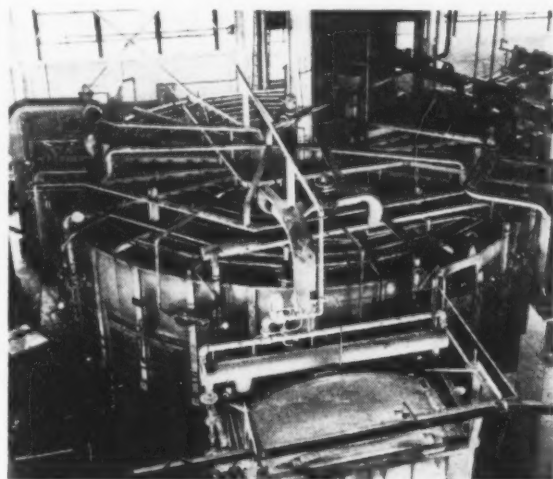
A Hagan rotary furnace, equipped with mechanical loading and unloading devices, heats 300 billets per hr.
